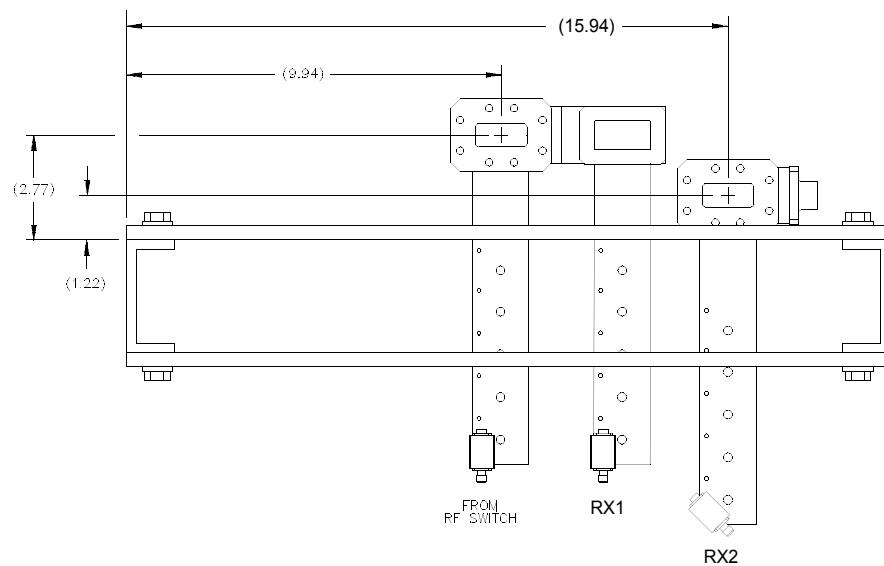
ACU, hot-standby Transmitters, space-diversity Receivers (front view), mechanical drawing
